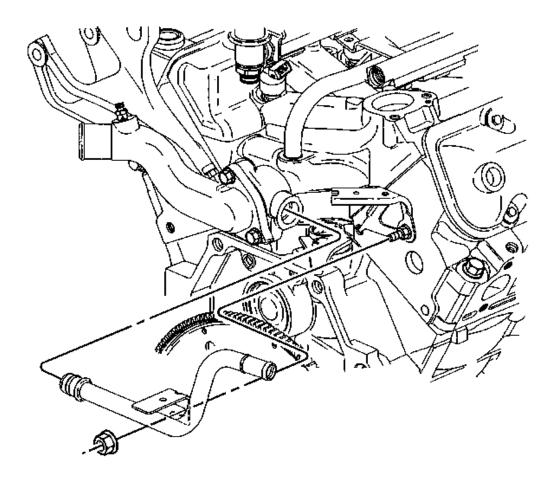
Removing Heater Inlet Pipe Courtesy of GENERAL MOTORS CORP.
